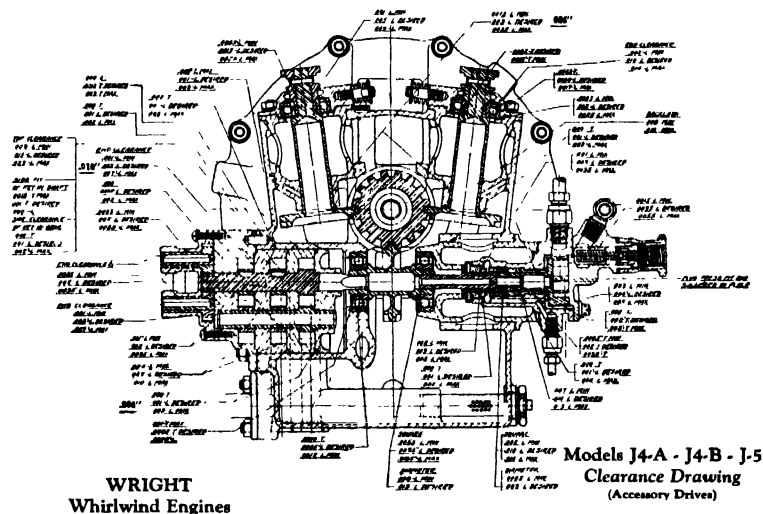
Accessory Drives of Models J4A, J4B and J5 Wright Aviation Engines Showing Clearances.
